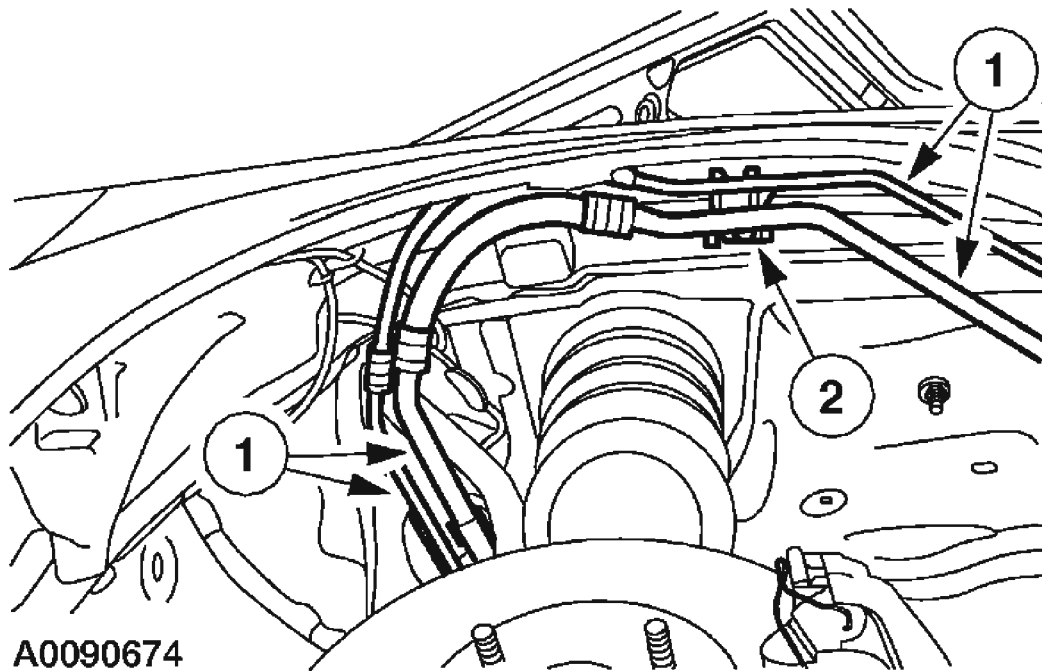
Disconnecting A/C Lines From Inner Fender Well
